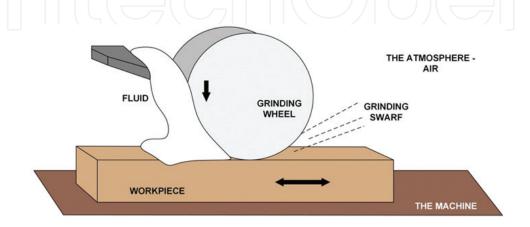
Simplified diagram of the grinding process, adapted from [2].
